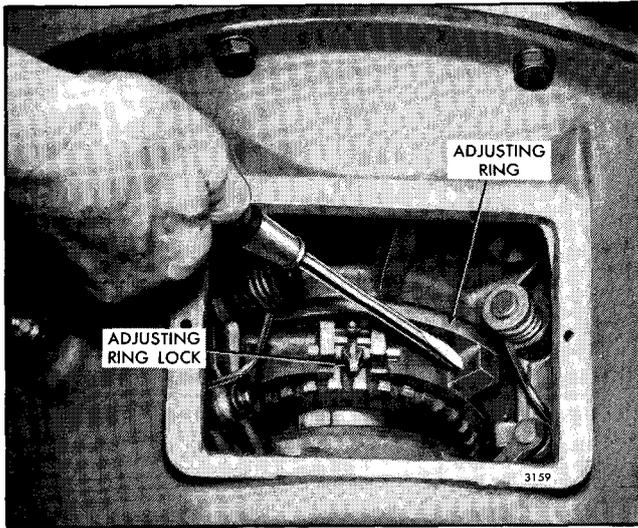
Power Take-Off Assembly Showing 14" Diameter Clutch Adjustment Ring
